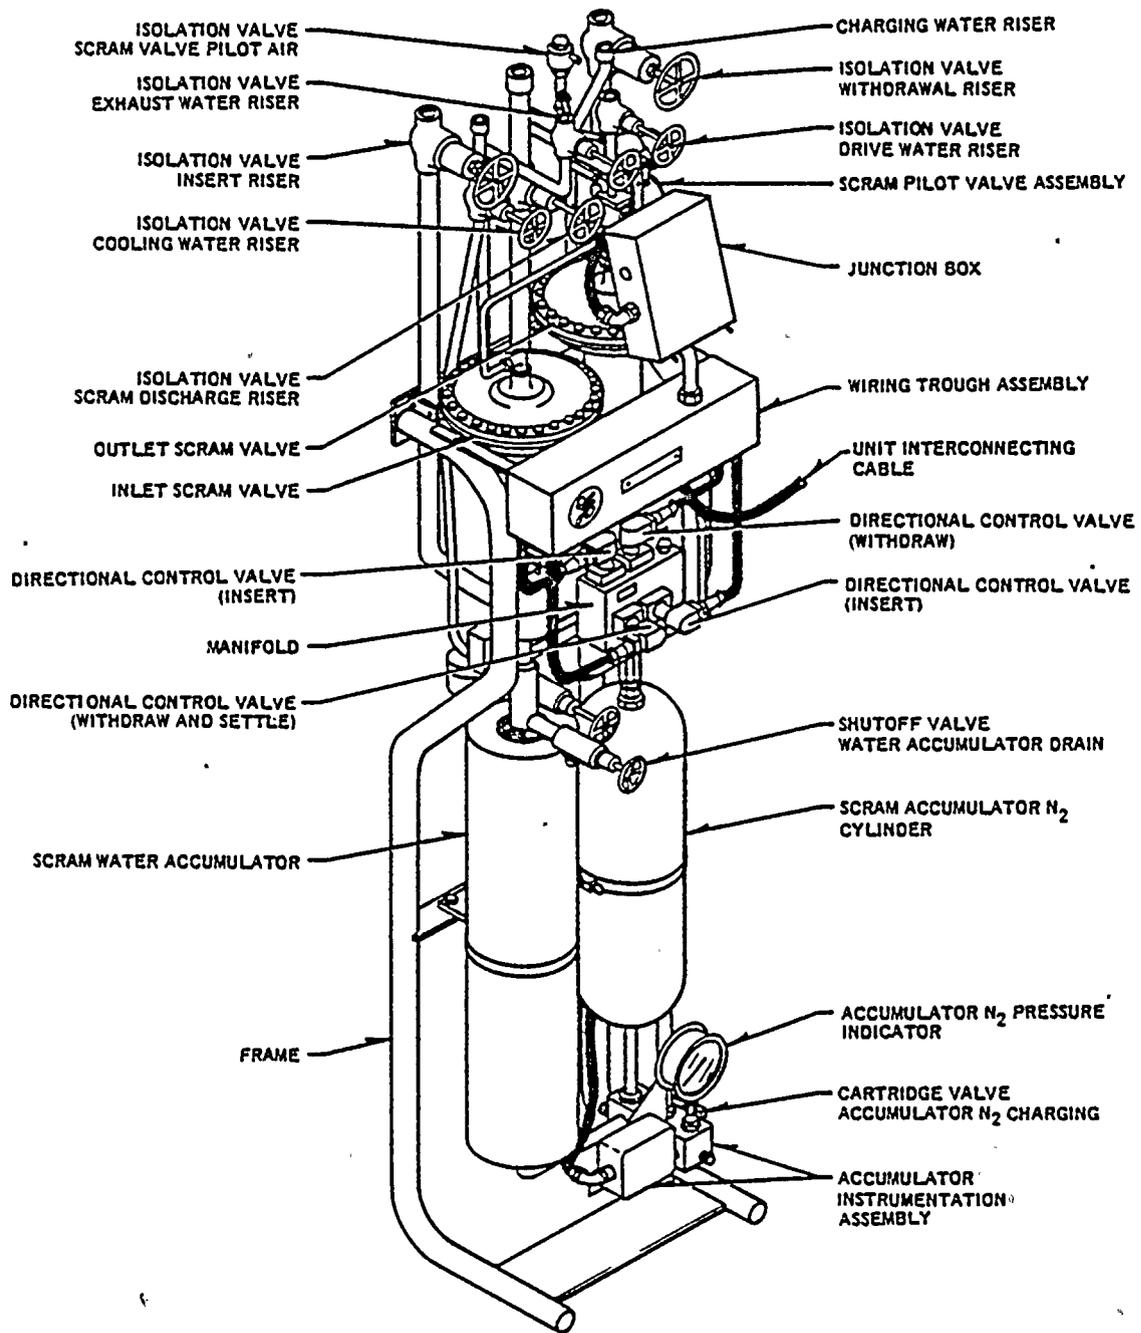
Control Rod Drive Hydraulic Control Unit (component assembly)
